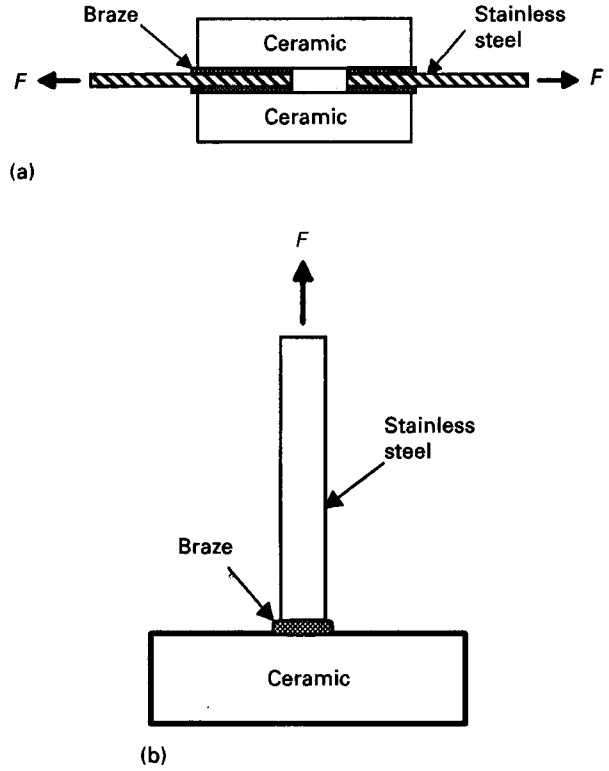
Configuration for joint strength testing for joints between stainless steel (shaded) and alumina. (a) Shear (b) tension. Dimensions are in mm.
